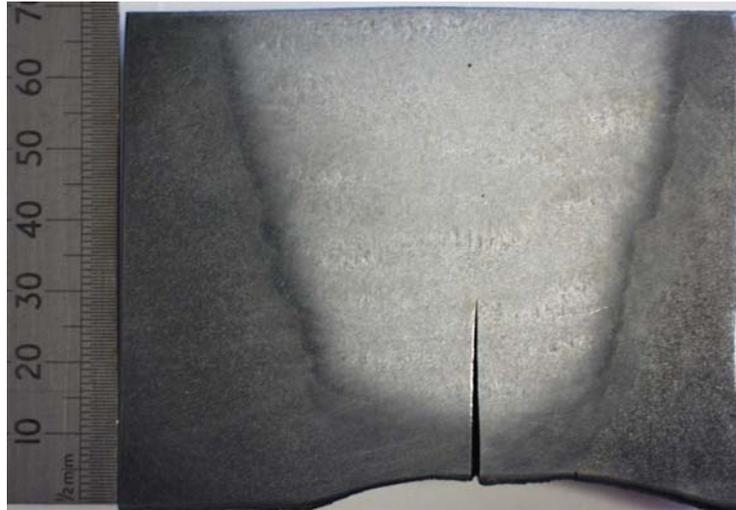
Steam Pipework Thermal Fatigue Crack
